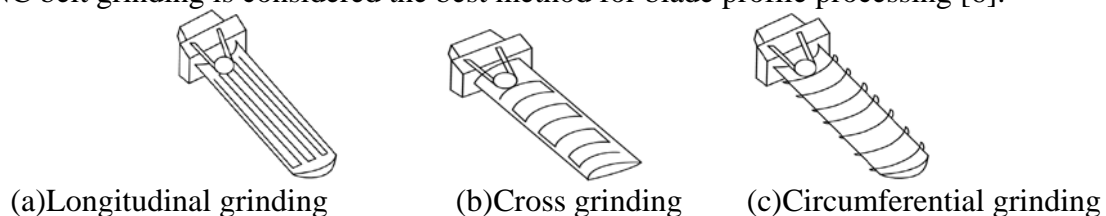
Different forms of CNC belt grinding for blade-like surfaces
